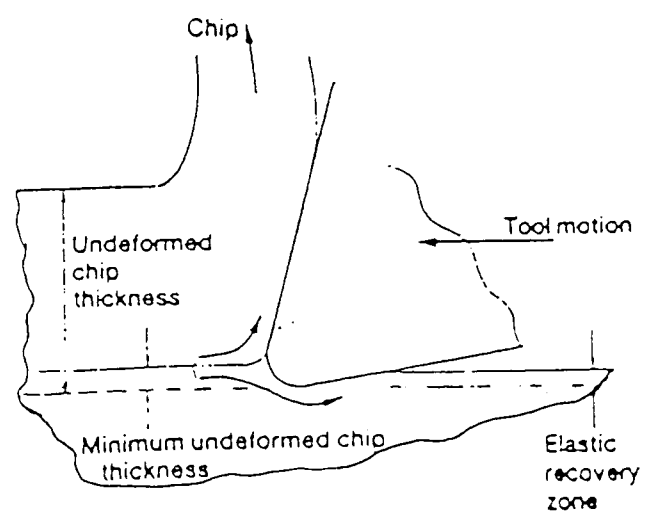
b A tool's cutting edge showing the large radius and minimum undeformed chip thickness.
